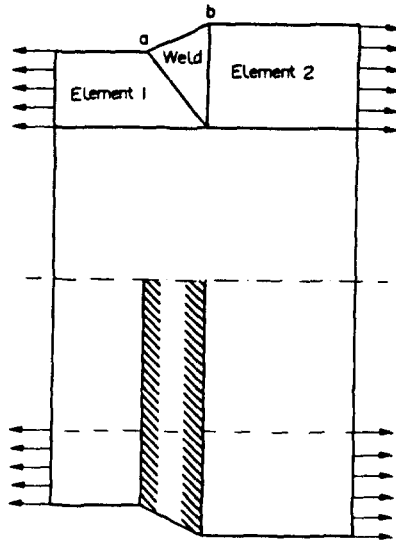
Cylindrical elements after welding before machining undergoing axial loading.
